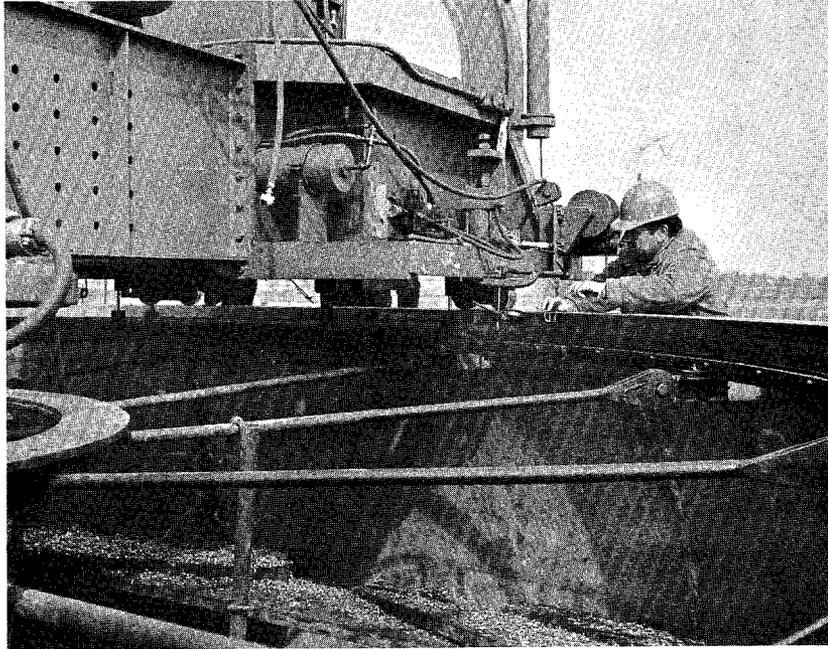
Field machining on the vacuum tank of the 15-foot bubble chamber.
